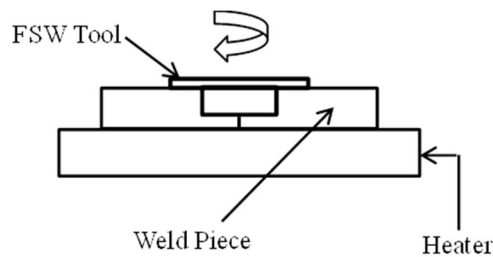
Weld pieces preheated by a bottom heater
